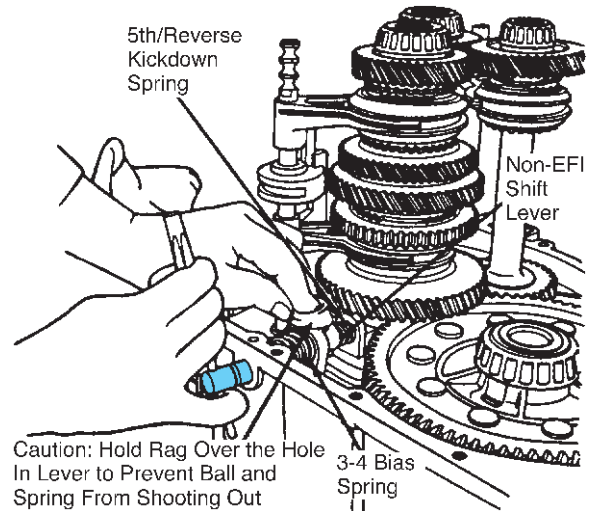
With some transaxles, the internal shift linkage is removed after the case cover has been removed. (Courtesy of Ford Motor Company)
